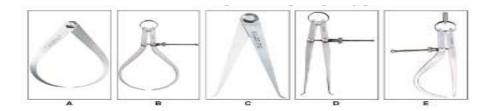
Calipers: A-firm joint outside caliper. B-Bow spring outside caliper. C-Firm joint
